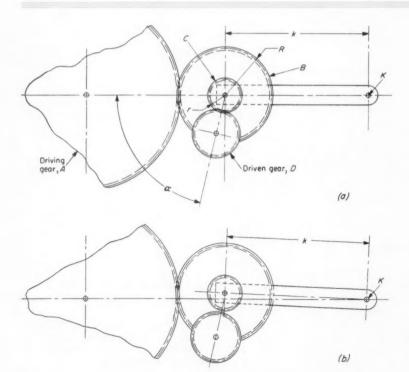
Gear train with intermediate gear C engaged with driven gear D in a, and C and D disengaged in b. Proper length of shifting lever arm k will permit "nongrating" disengagement of gears C and D.
